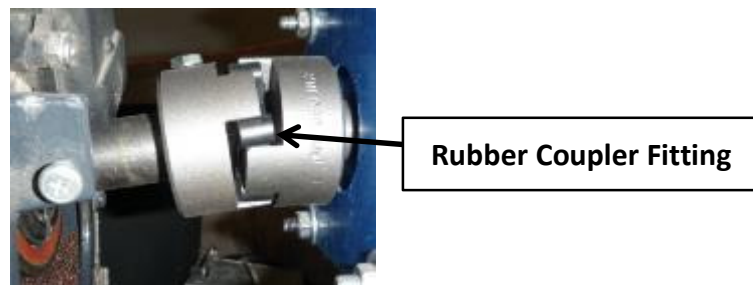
Coupling and uncoupling the lovejoy coupler from the stepper motor drive when removing and installing a meter roller in the metering assembly.
